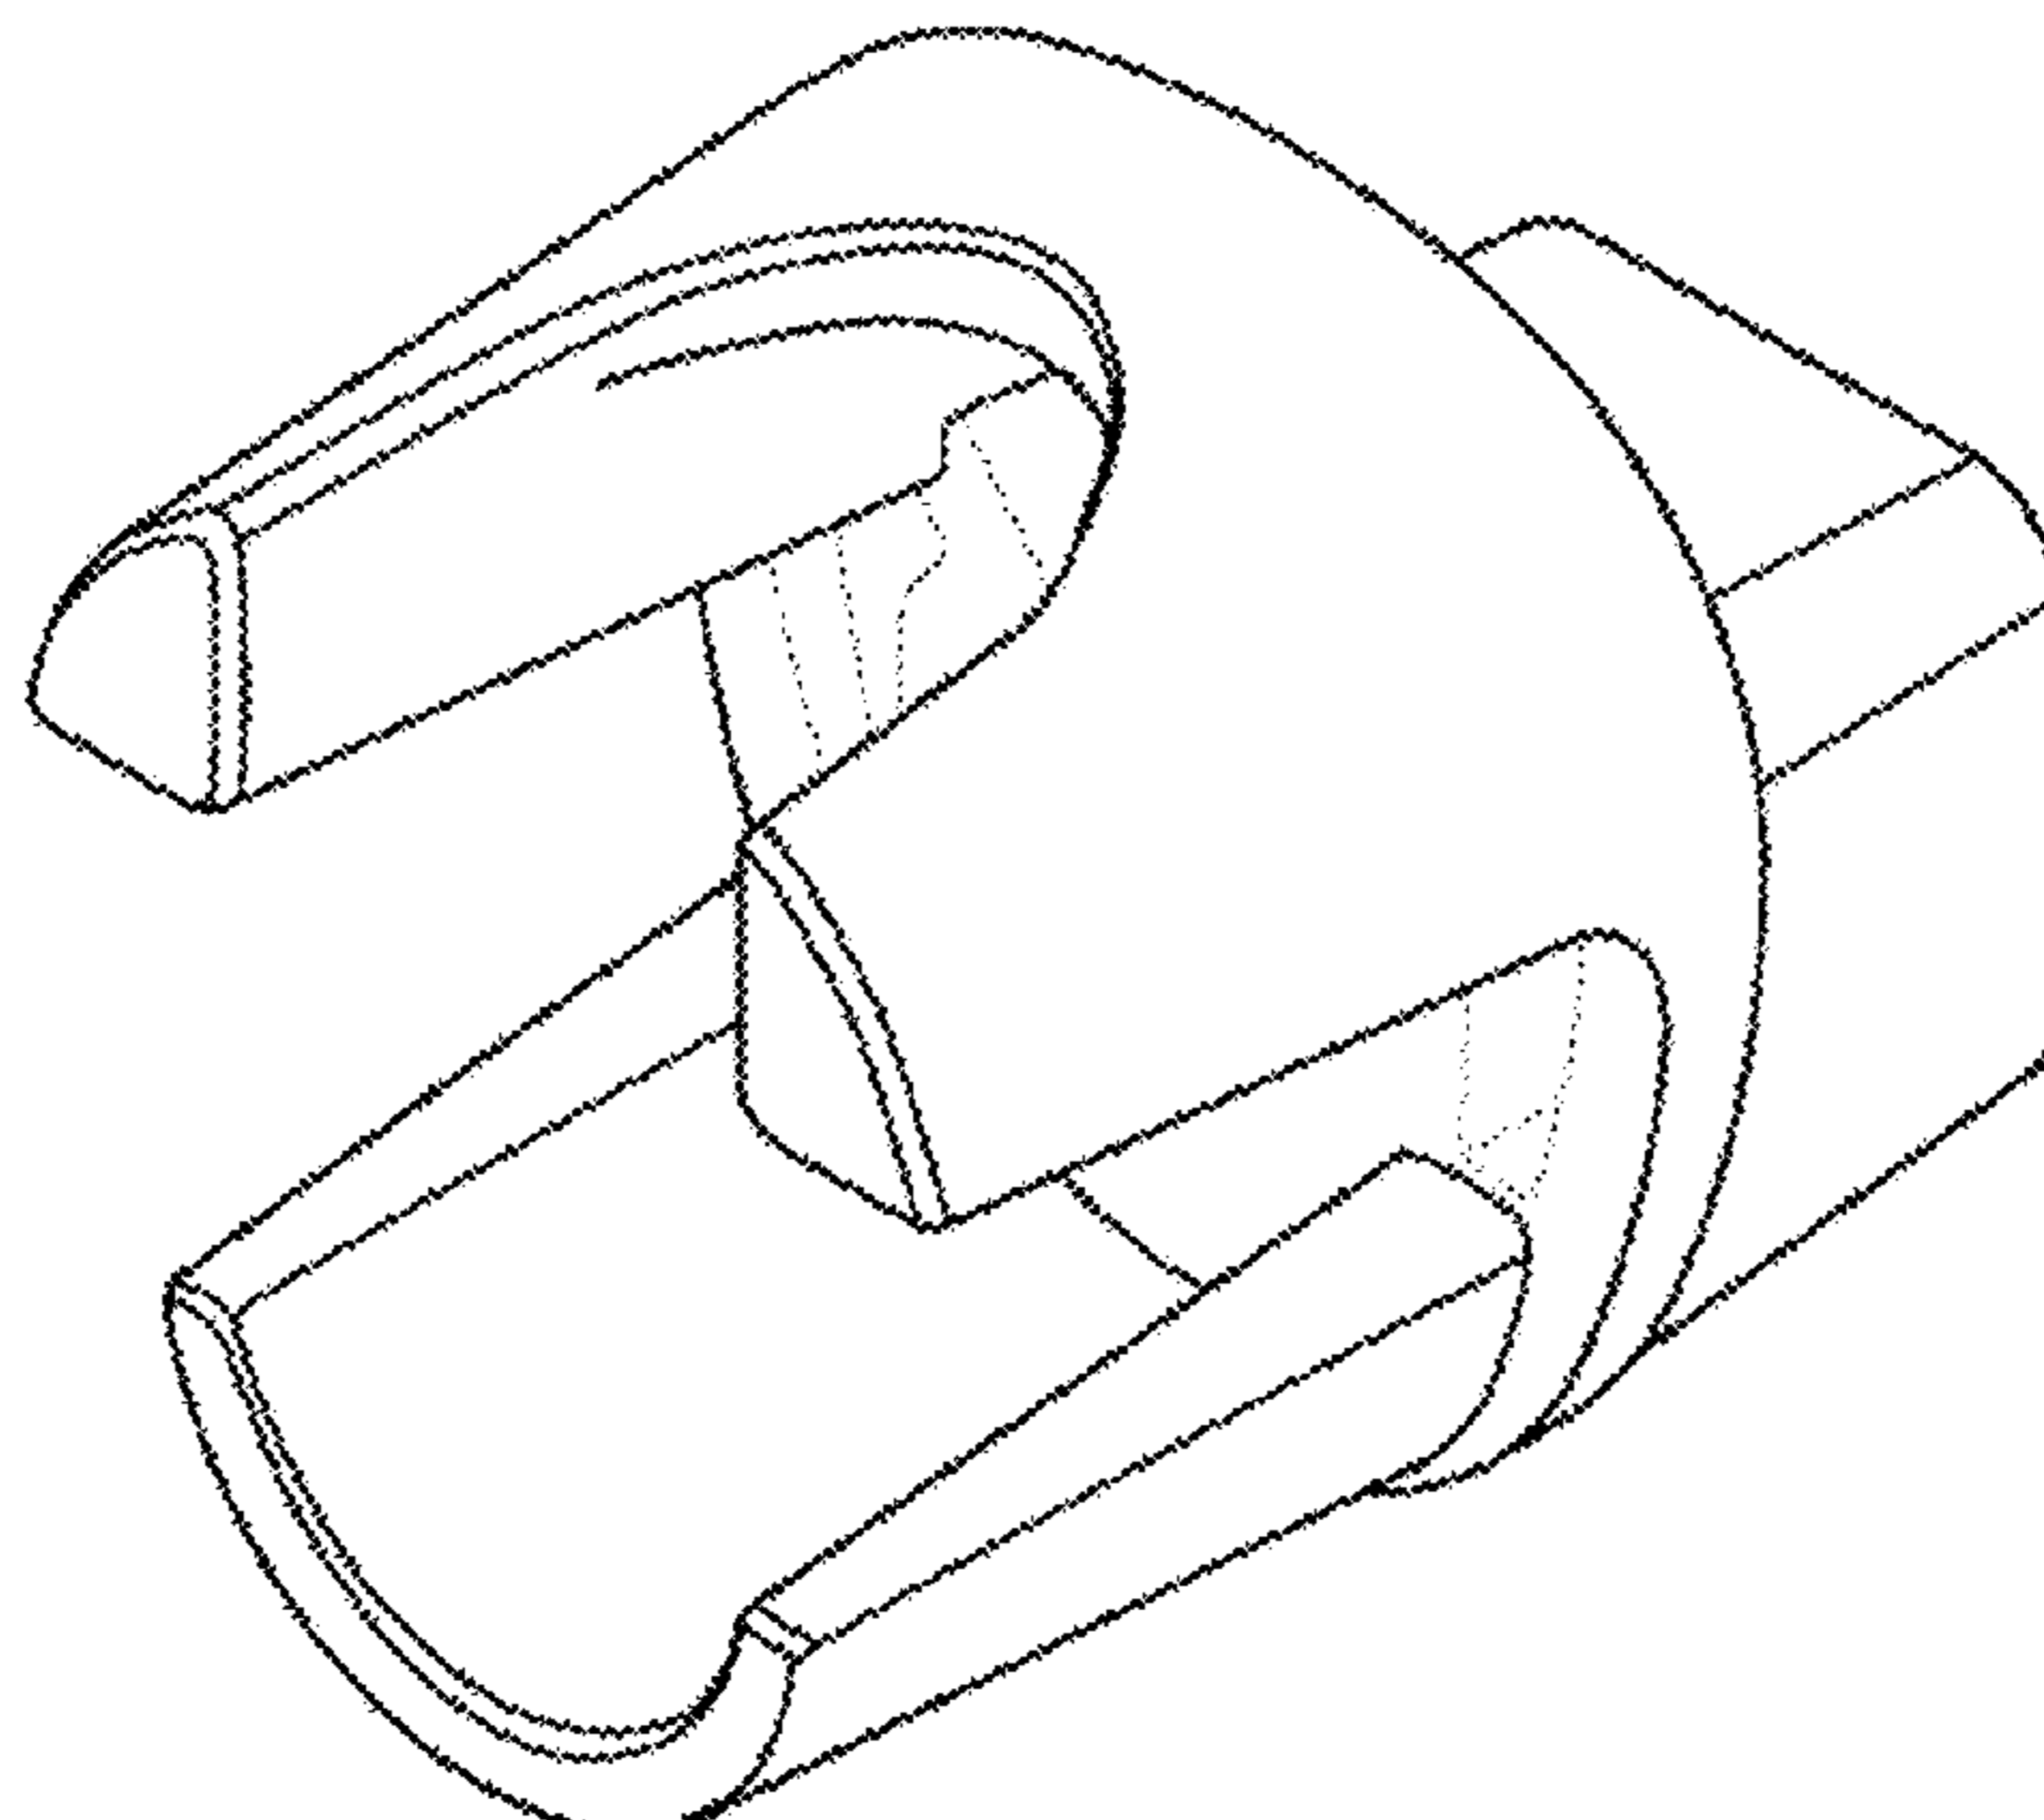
is a front-top-right perspective view of a tool for driving a fastener;
